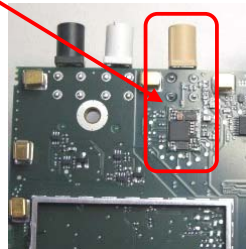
Main PCB bottom view, detail picture of Bluetooth module without shielding
